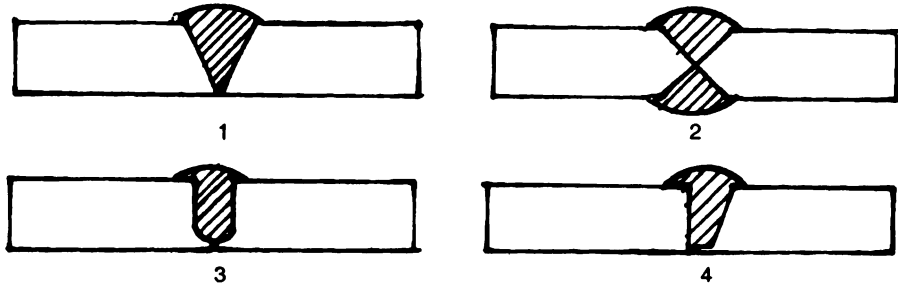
Butt welds: 1. Single V, 2. Double V, 3. Single U, 4. Single J.
